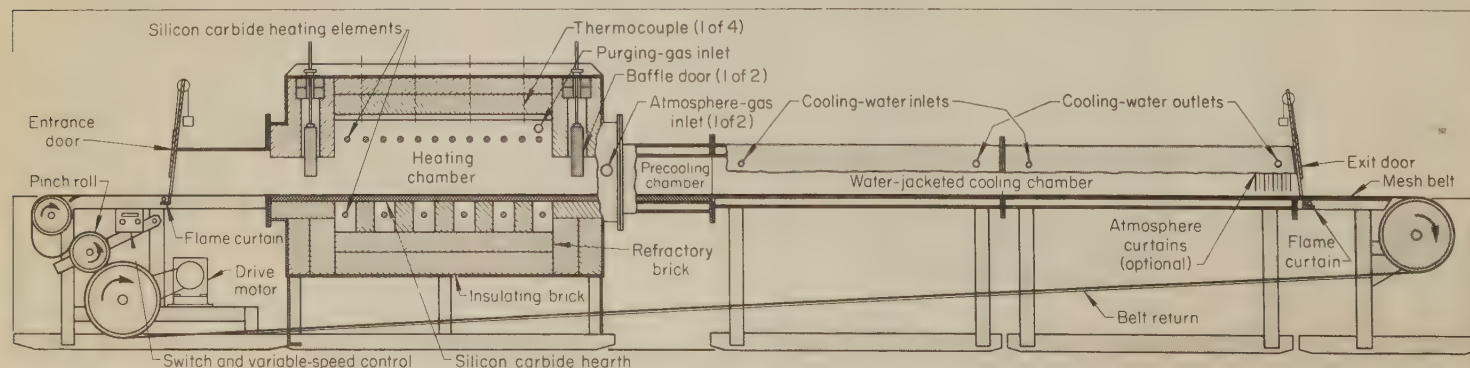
Mesh-belt conveyor brazing furnace with a water-jacketed cooling chamber
